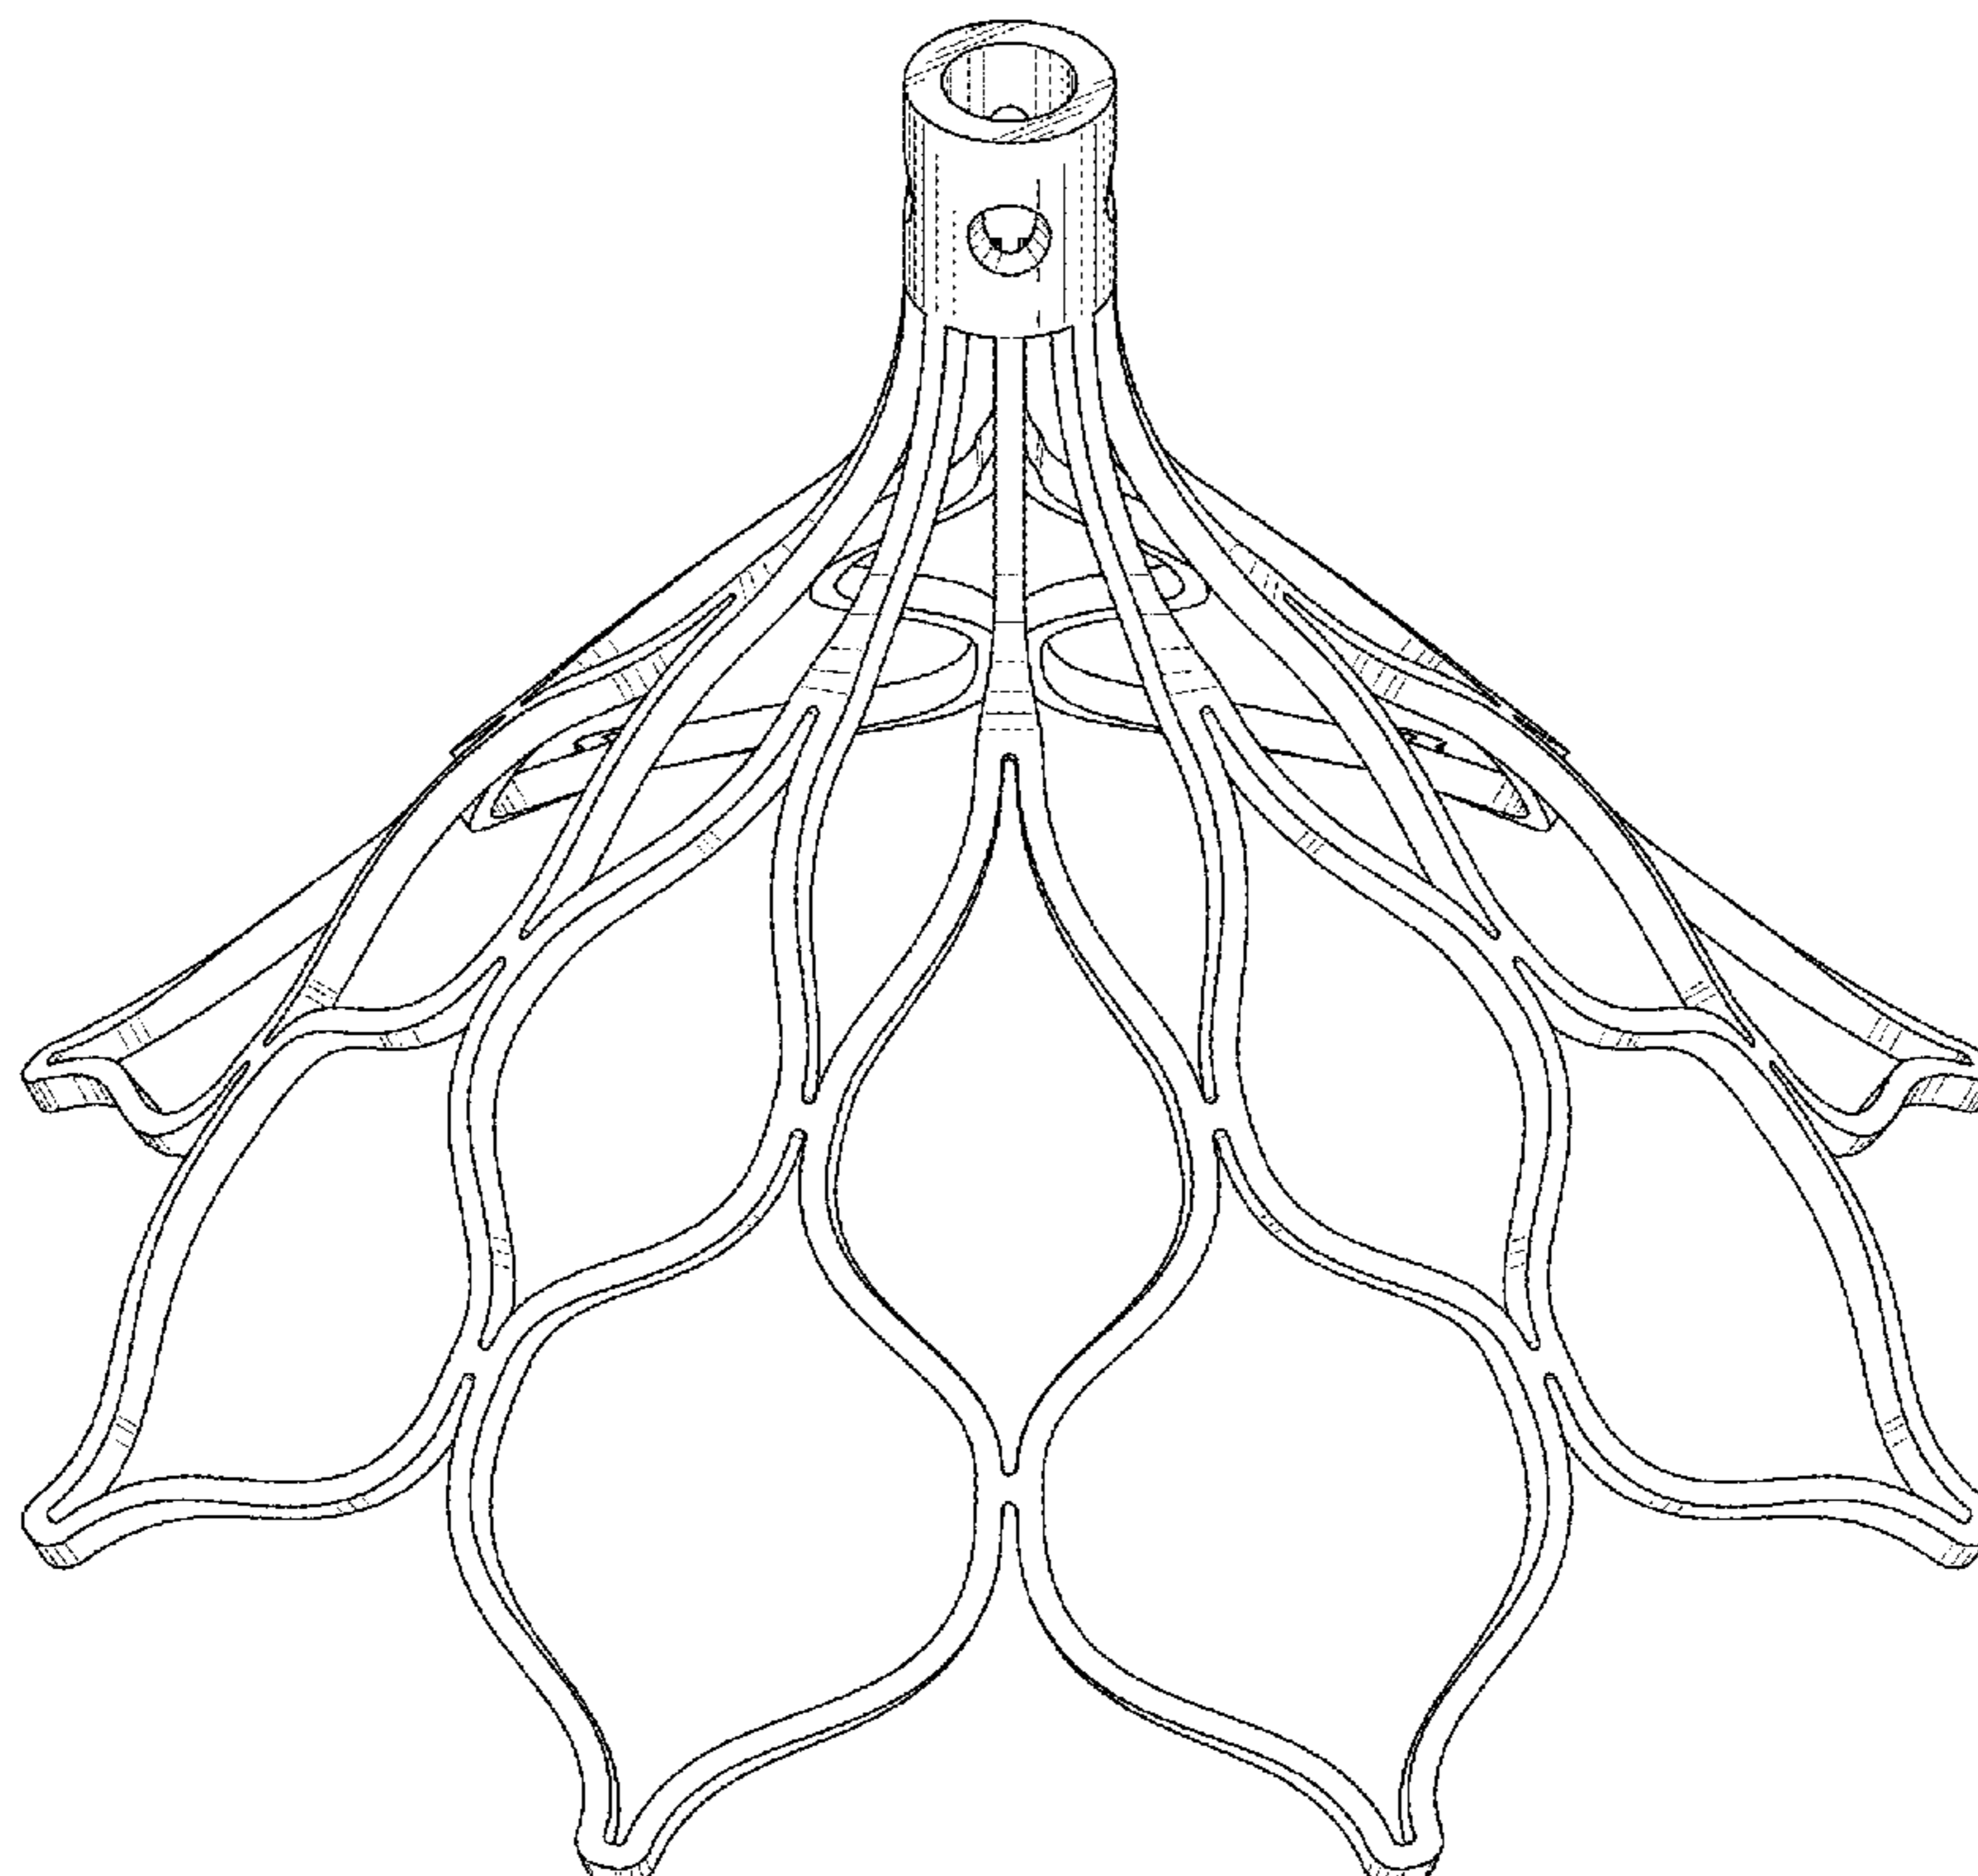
is a perspective view of the anastomotic hole sealing assembly of the present invention;
